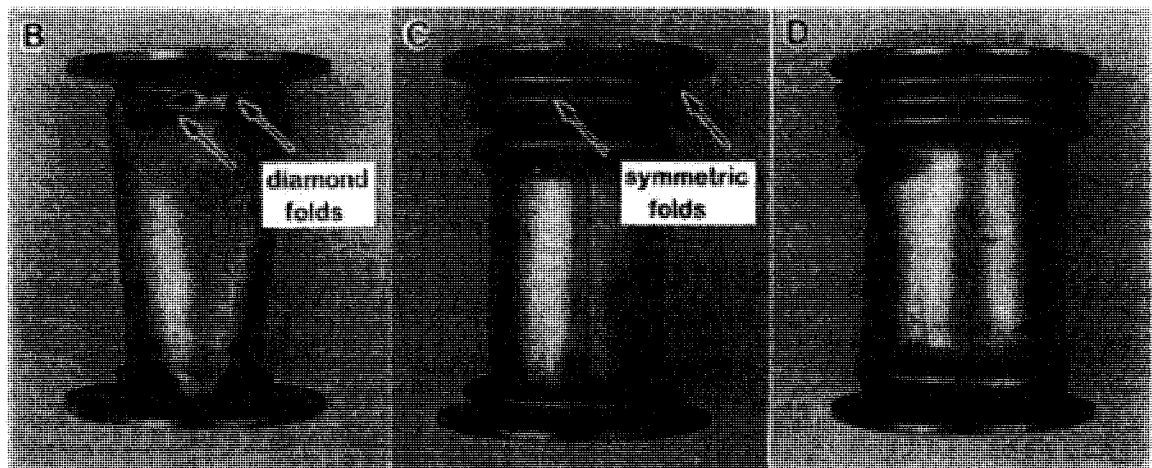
Deformed shapes of circular specimens. Both ends of the tube specimens were welded with aluminum panels [31].
